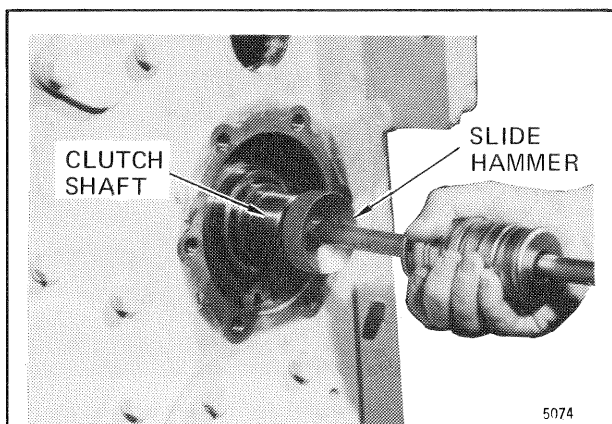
REMOVAL AND DISASSEMBLY OF CLUTCH SHAFT ASSEMBLY (Sheet 2 of 4)
